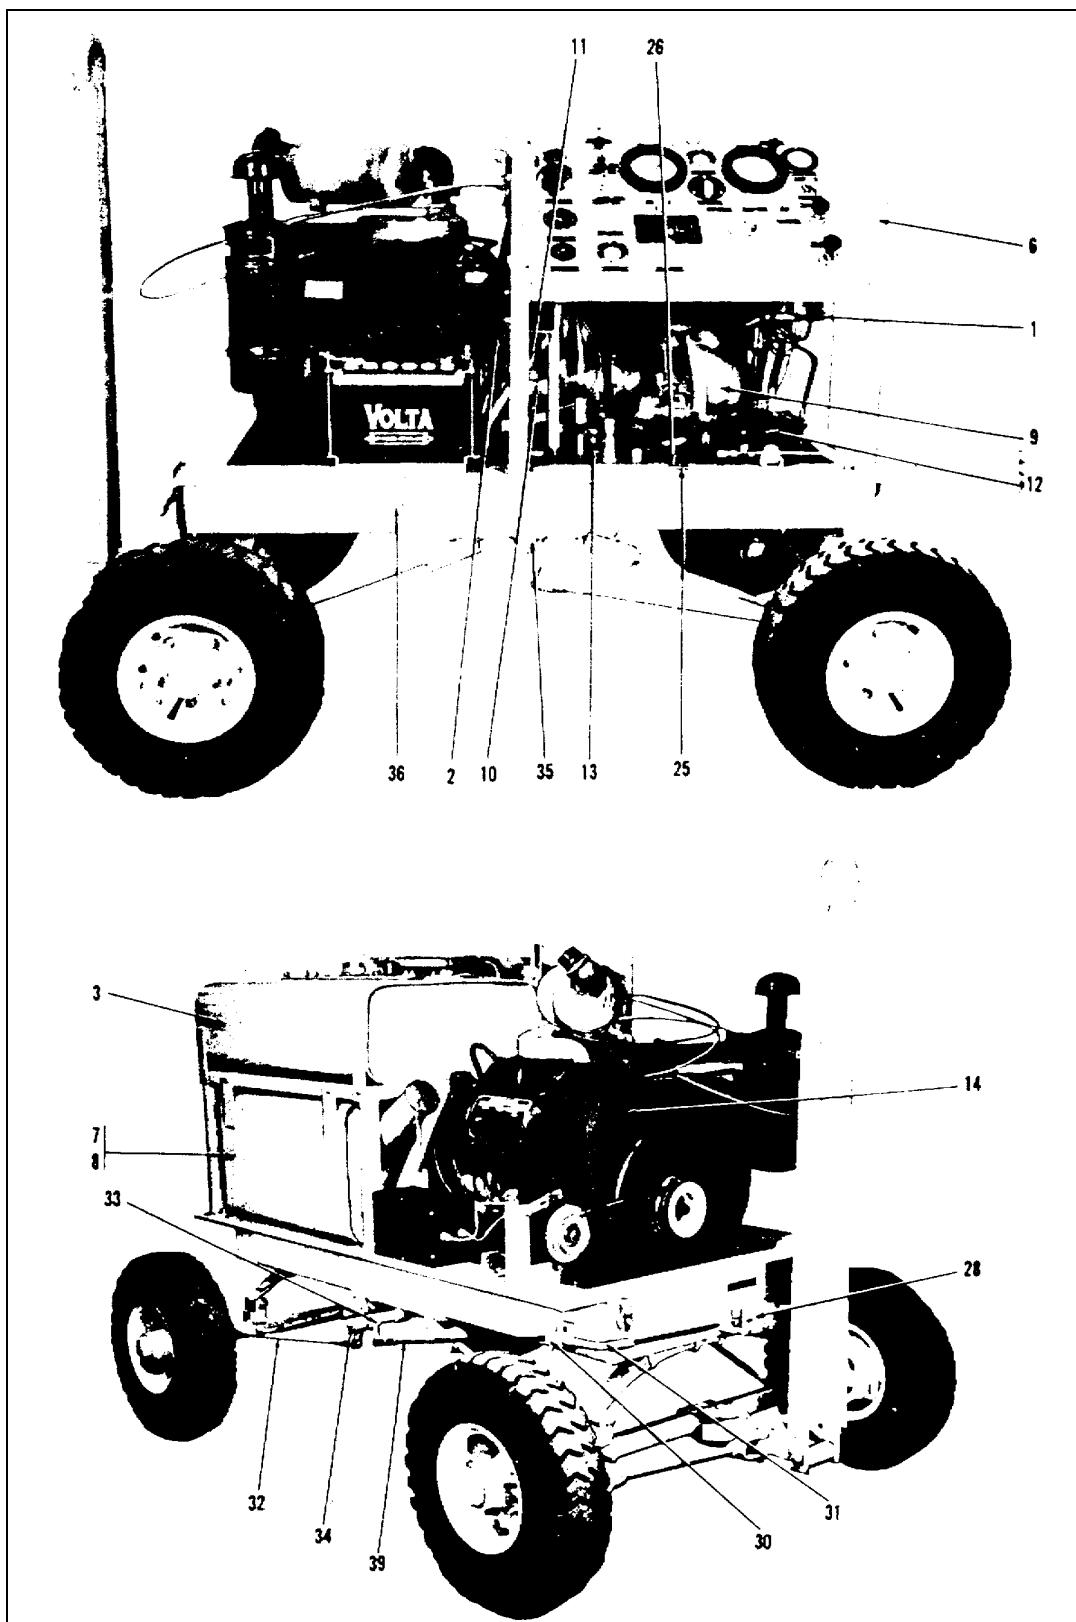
Internal Components Assembly (Sheet 1 of 2)
